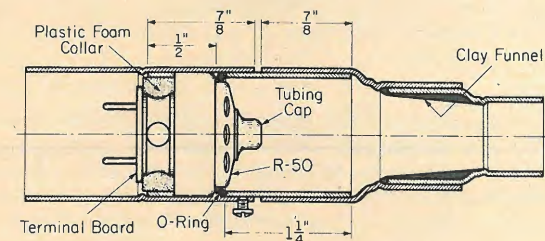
Driver mounting. The R-50 driver is shown captive between an O-ring gasket in front and a quarter-inch collar made of one-inch tubing in back. The collar is retained by the internal ridge of the coupling and holds the damping material in a compressed state. A quarter-inch flare-fitting tubing cap is cemented to the front of the R-50. The front cavity is made of one-inch tubing inserted in the one-to-three-quarter coupling. A clay funnel is molded in the three-quarter-to-one-half coupling.
